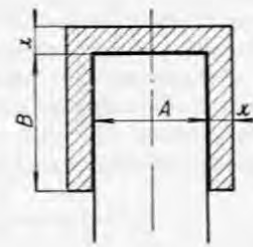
Surface area around the cylinder for heat transfer to the cooling medium.
